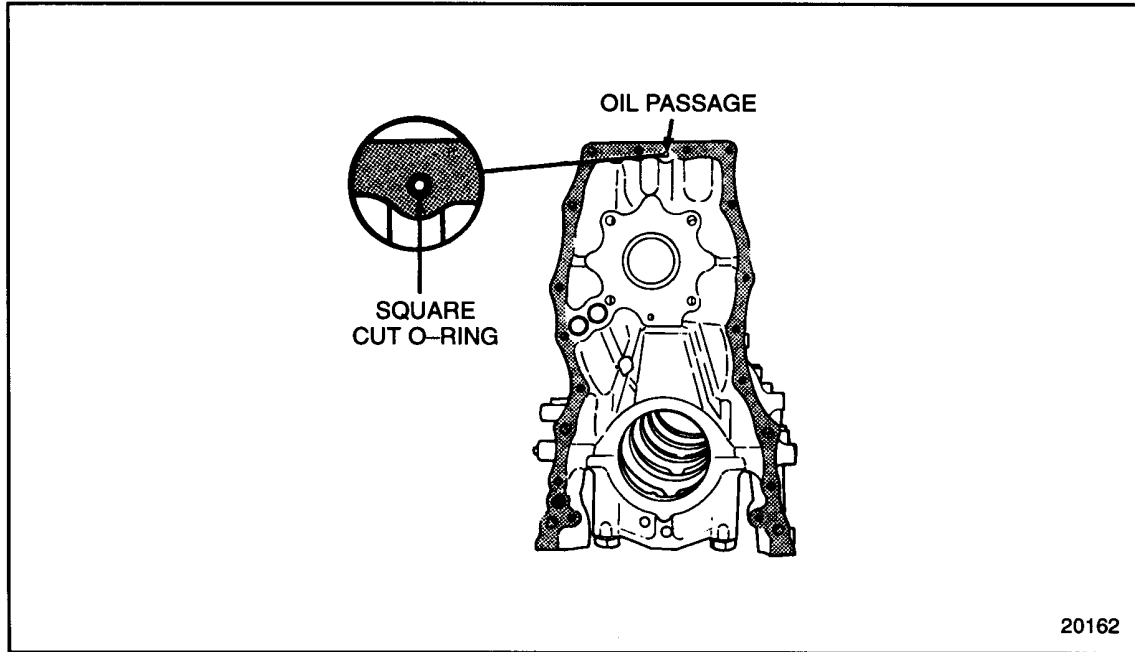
Gasket Eliminator Application (Cylinder Block)
